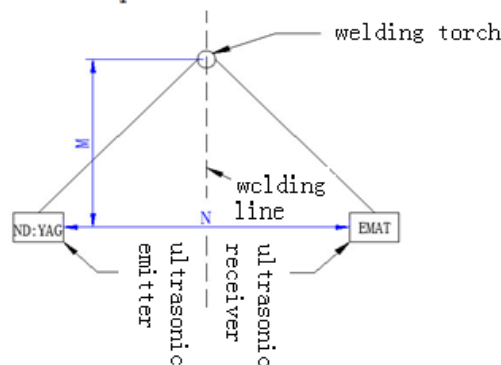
The relative position of ultrasonic sensor and welding torch
